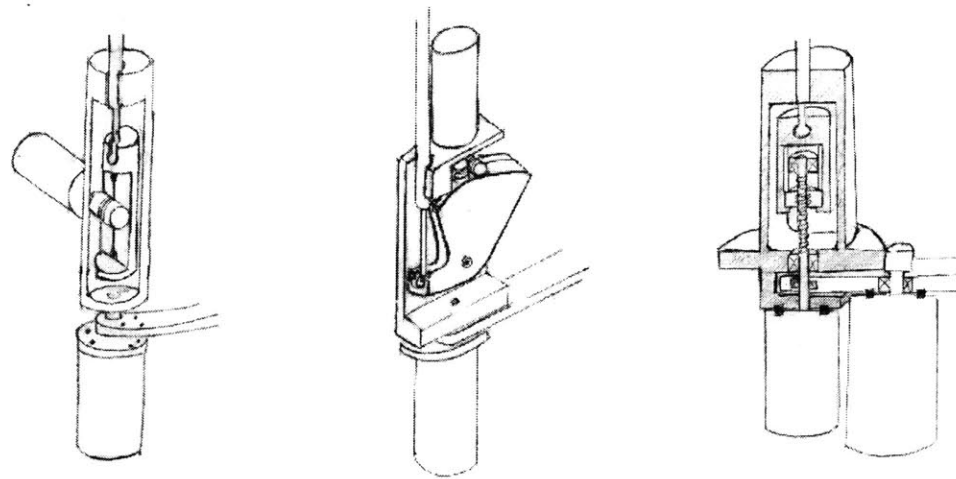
Refined concepts. From left to right, linear capstan, arc-section cable drive, and ballscrew.
